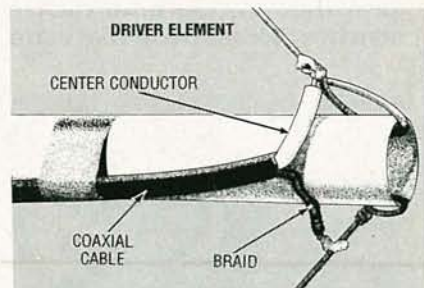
A CLOSEUP VIEW OF THE coaxial cable connection to the driver feed point. Make sure you use a heat sink between the solder points and the plastic PVC pipe to avoid melting.
